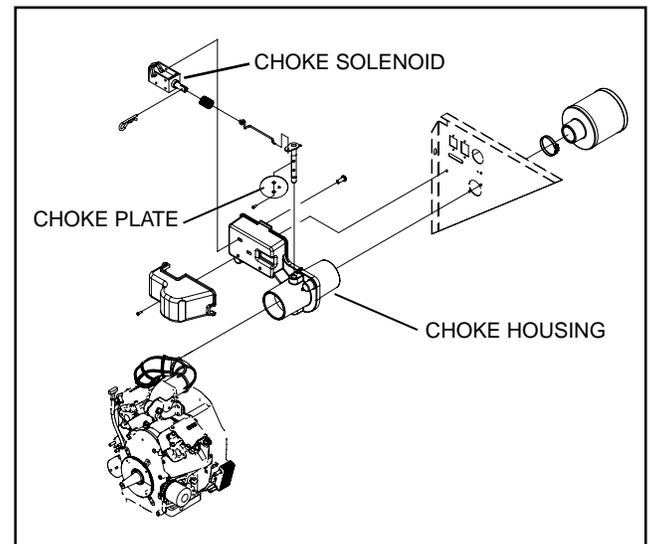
Exploded View Showing Location of Choke Plate - 10 kW Units
